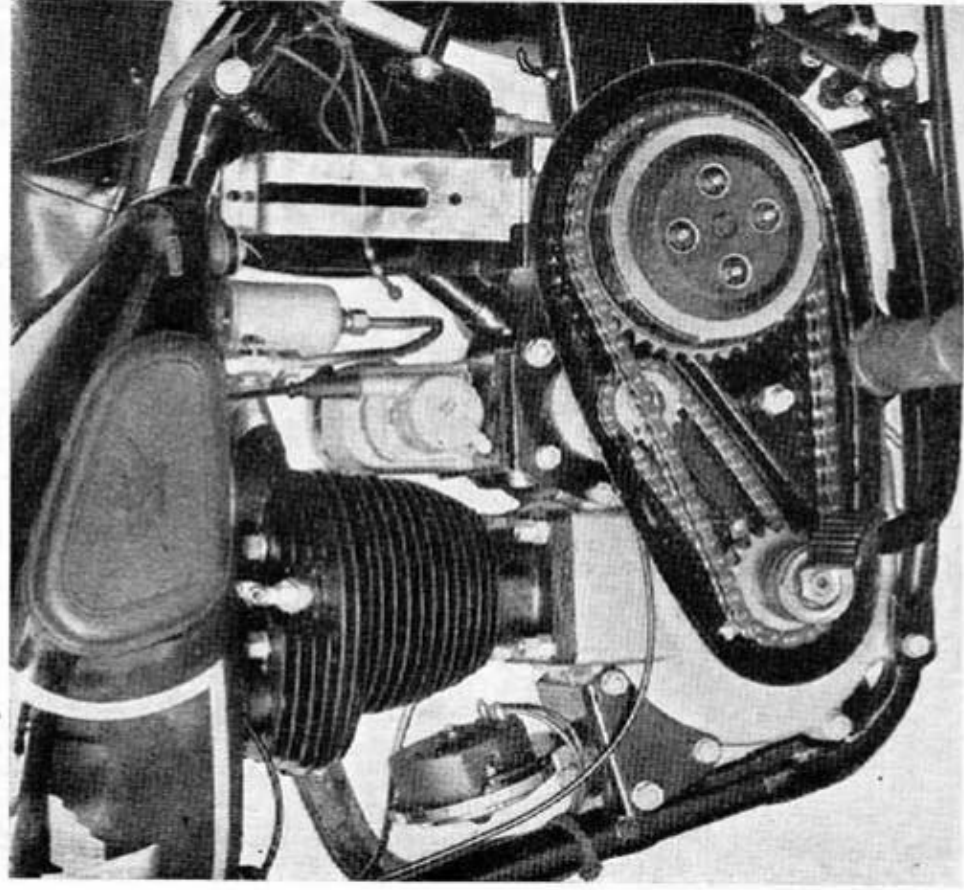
MATCHLESS WITH OIL-BATH CHAIN CASE, OUTER HALF REMOVED
